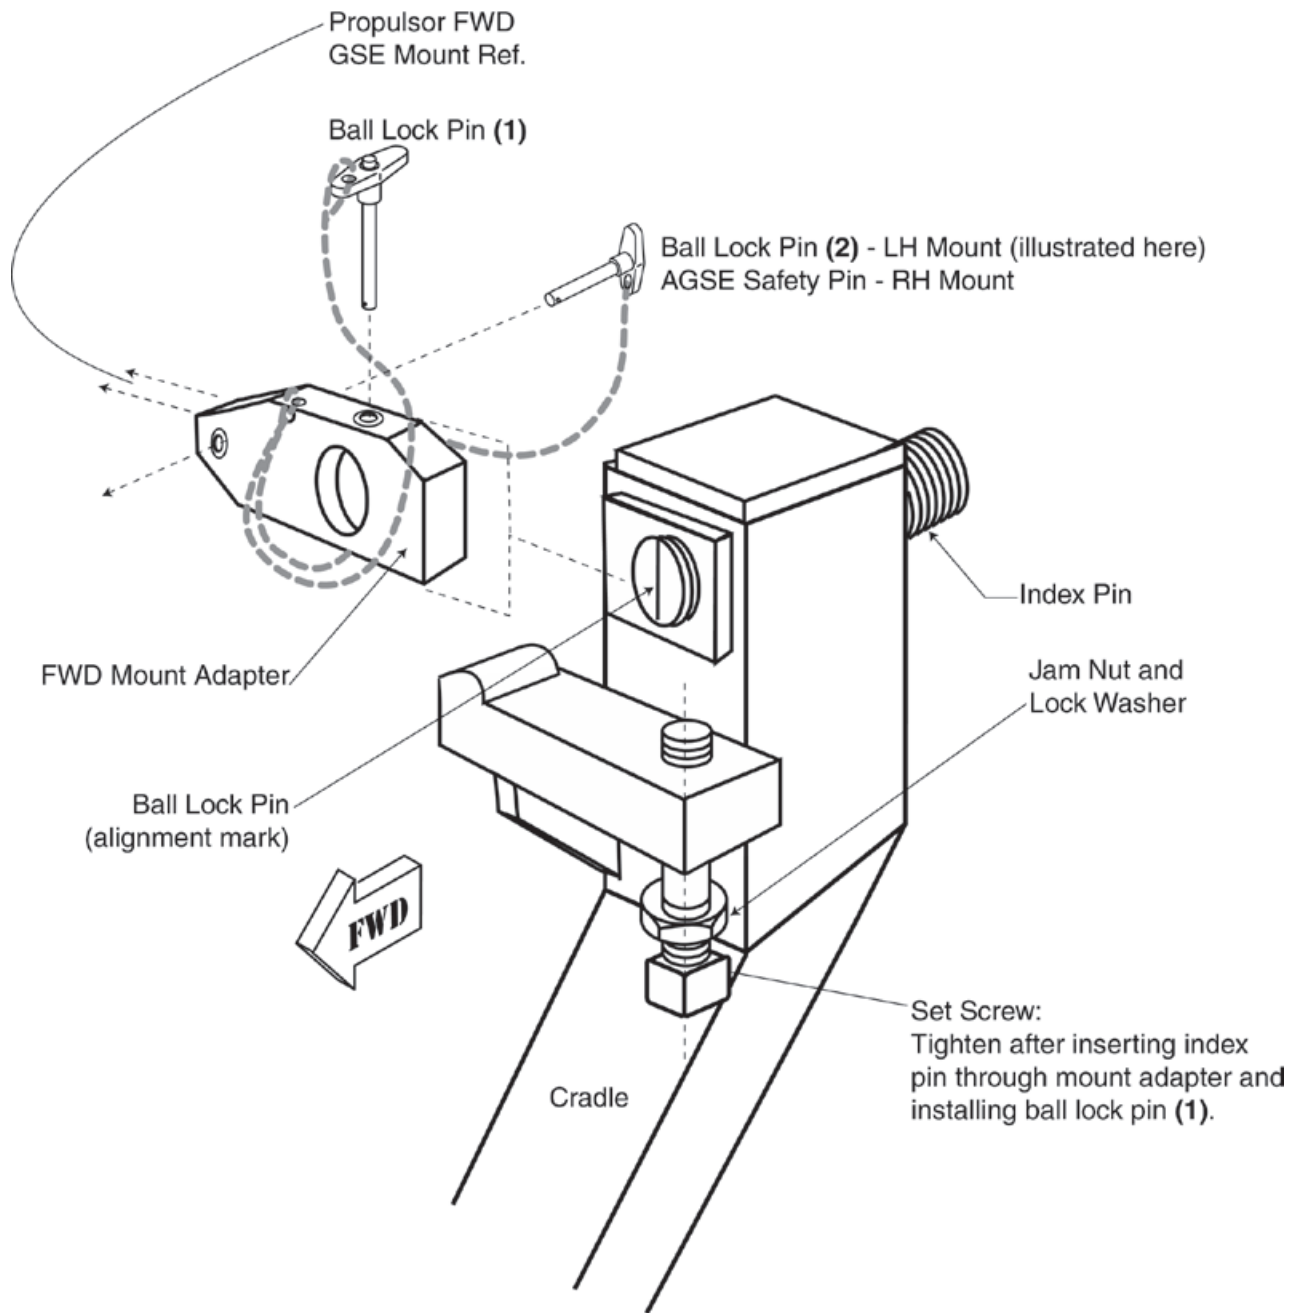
Exploded View showing Ground Handling Mount Assembly
